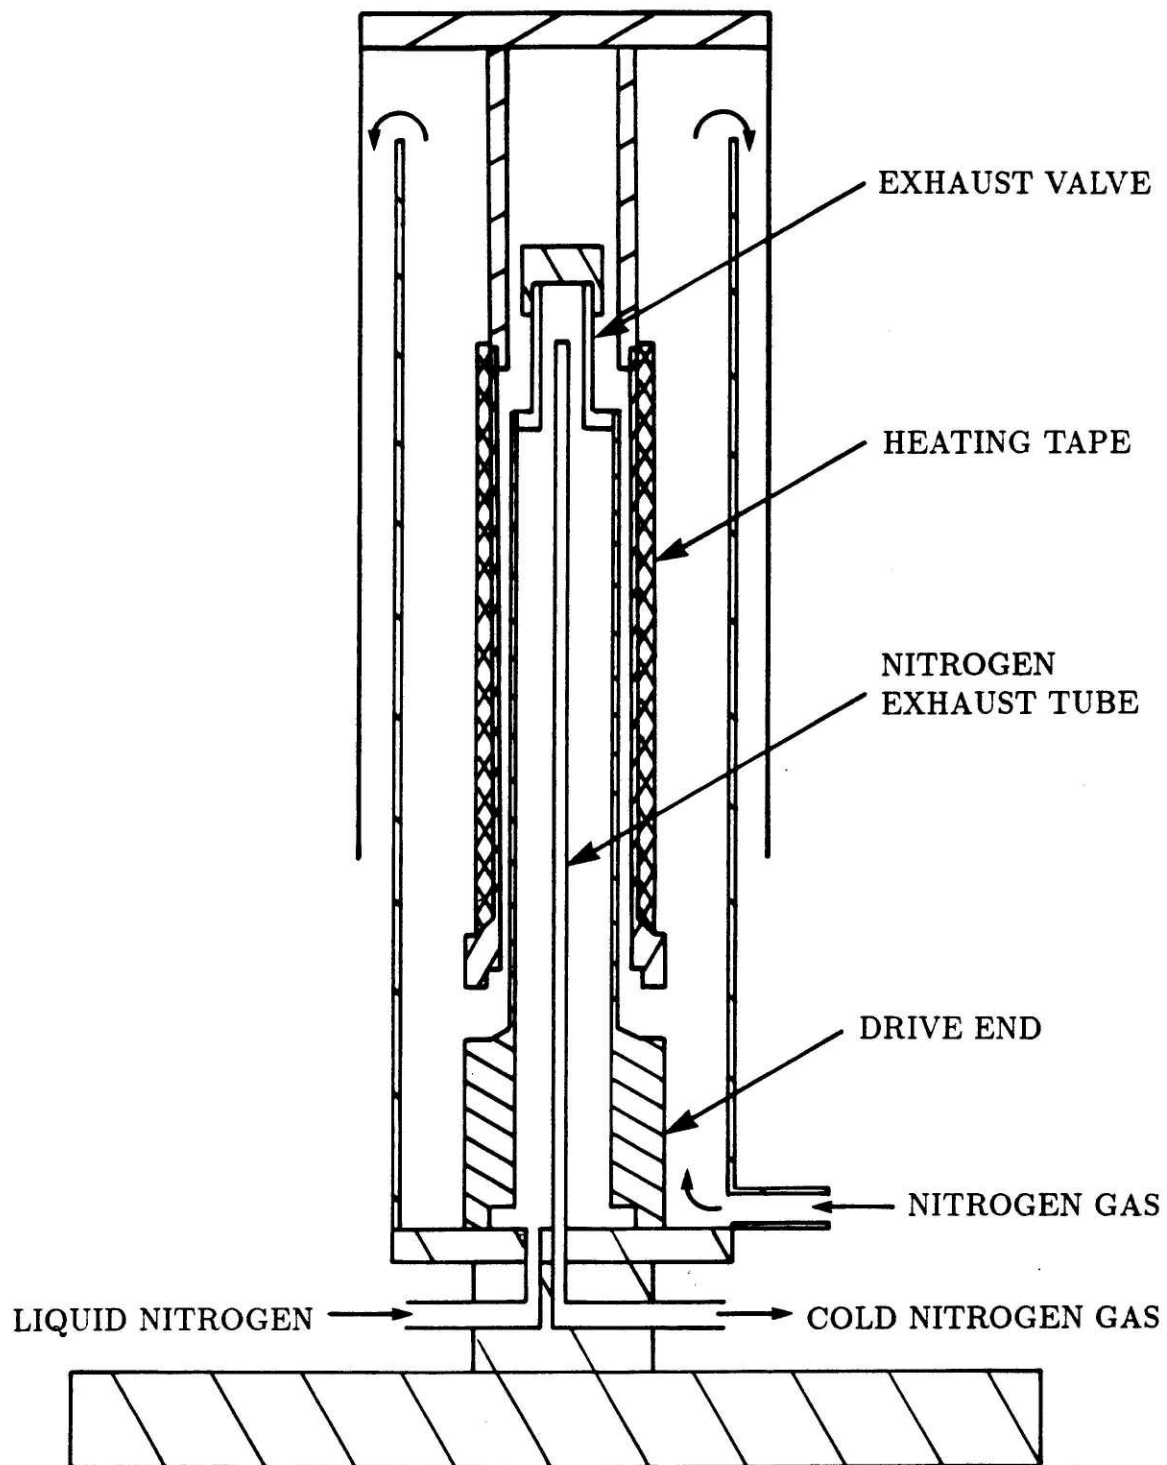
Cross section of jig used to assemble cylinder and outer shell.
